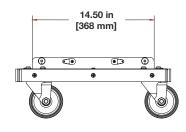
MCF-MINA/LINA Caster Frame Dimensions
